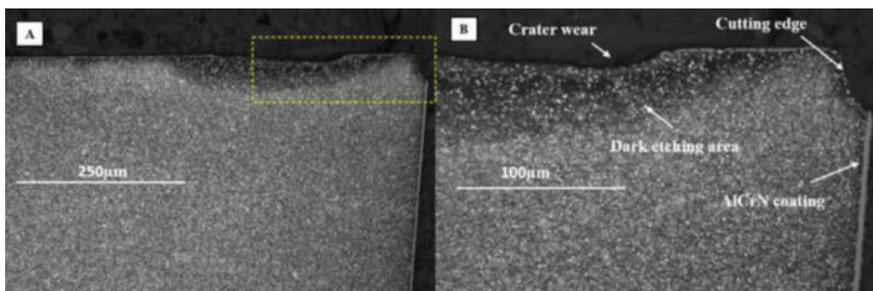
Etched cross-section in LOM, of a representative worn cutting insert showing (A) the heat affected zone and (B) Magnification of the area pointed in (A) where complete detachment of the coating layer on the crater surface and cutting edge can be seen. The rake face is the upper horizontal side.
